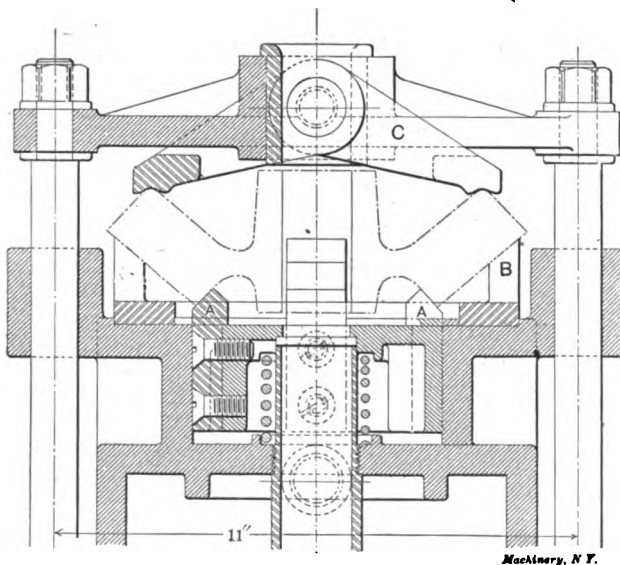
Vertical Section of Pneumatic Jig Fitted with Equalizing Centering Device
